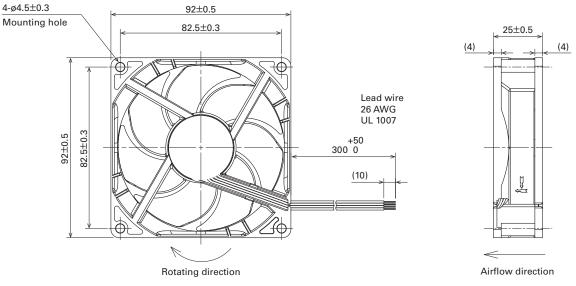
Dimensions of the new San Ace 92 (unit: mm)
